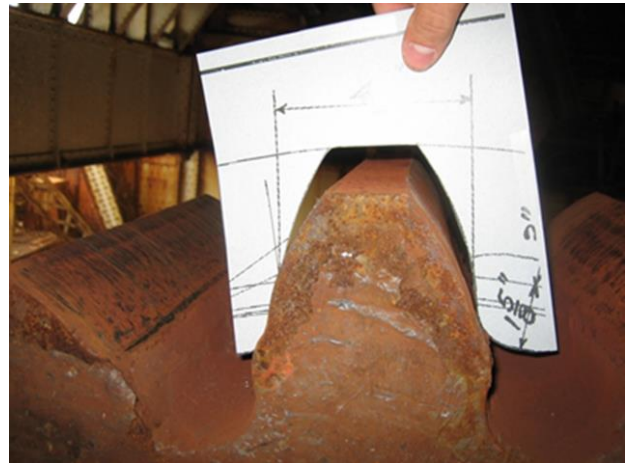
Pinion tooth wear shown on a representative north pinion tooth.
